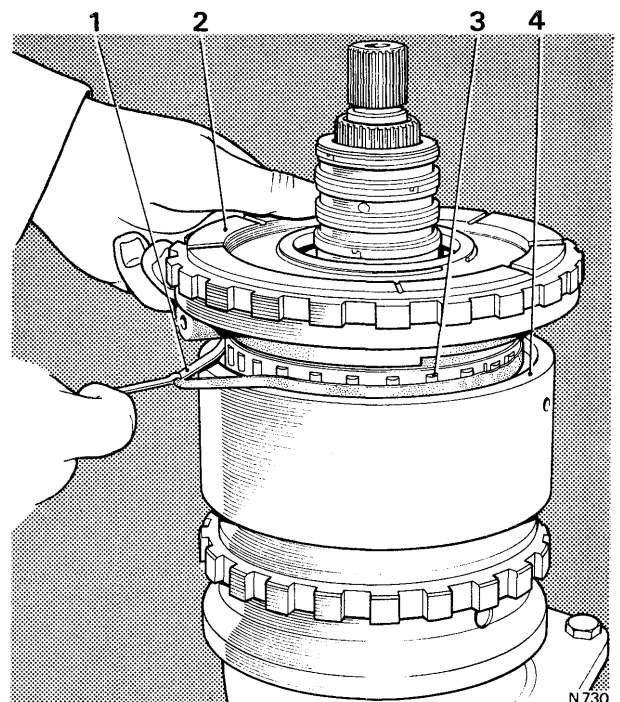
FITTING THE CENTRE SUPPORT TO THE REACTION CARRIER (SPRAG CLUTCH)
